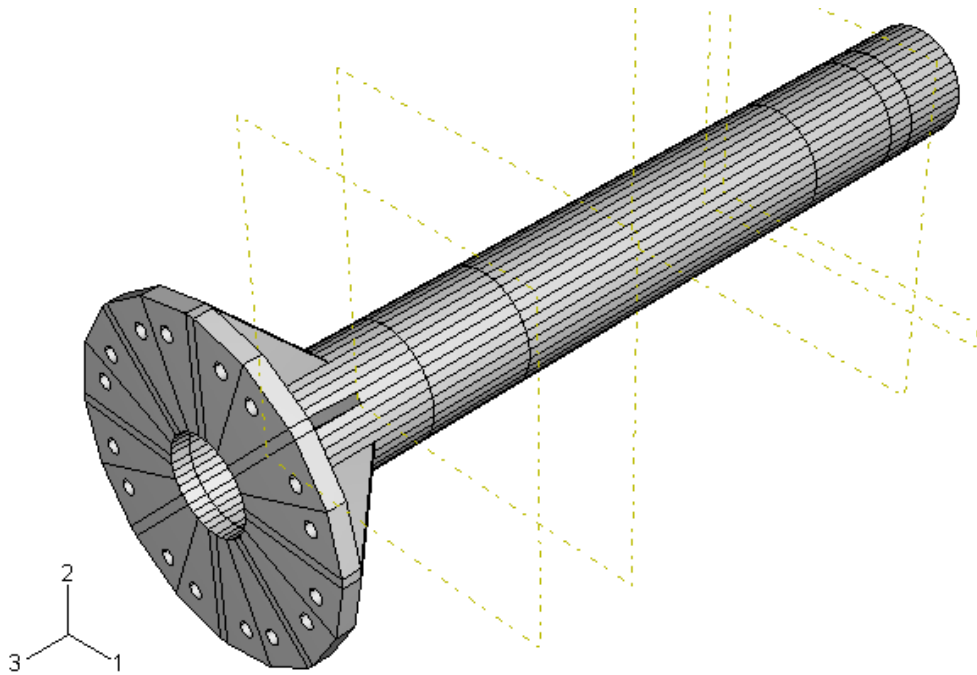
Geometry of the Shaft Side Hub Shaft Connection FEM Model
